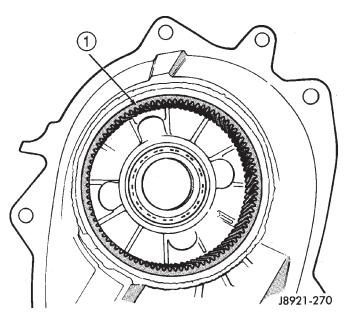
Inspecting Low Range Annulus Gear 1 – LOW RANGE ANNULUS GEAR
